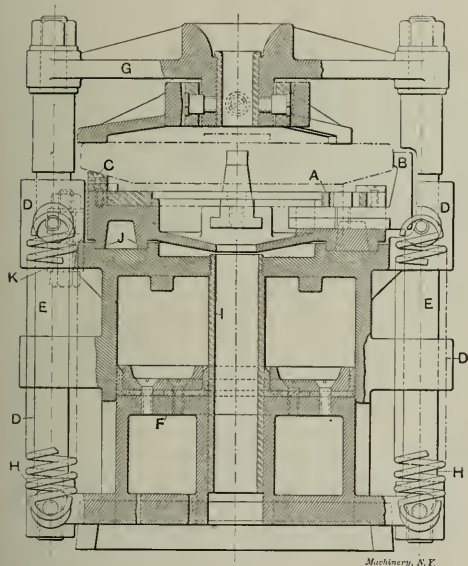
Vertical Section, Pneumatic Clamping Jig for Work on Agricultural Machinery.
